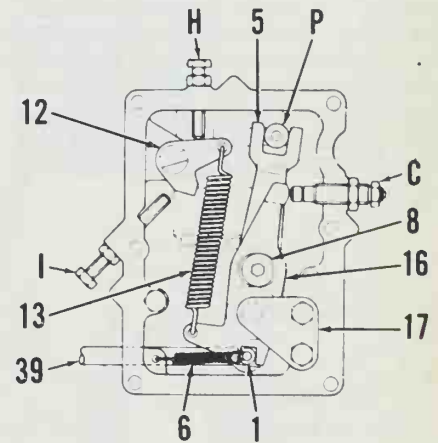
Drawing of governor and throttle control linkage. Refer to Fig. L4-20 for parts identification.
